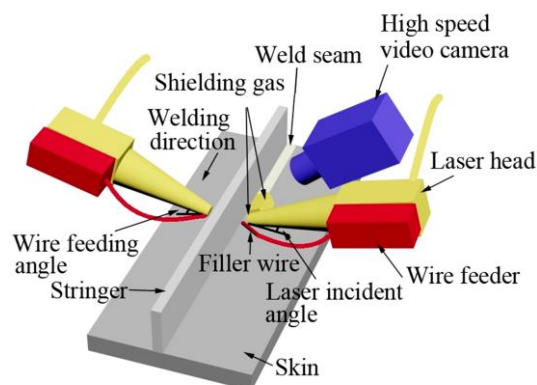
Schematic illustration of double-sided synchronized laser beam welding system
